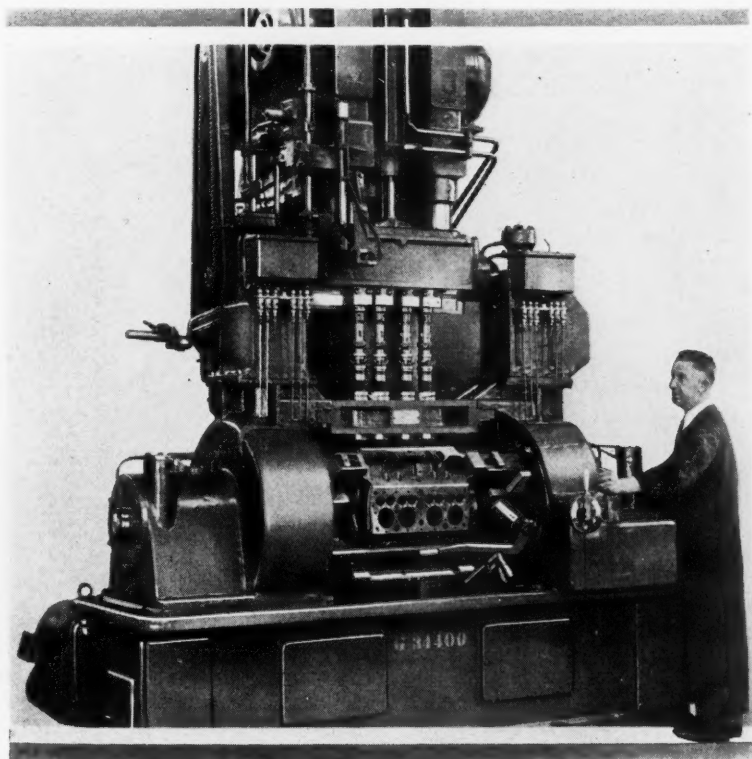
Honing the Cylinders of a V-type Cylinder Block in 45 Seconds on a Barnes Drill Co.'s Honing Machine
